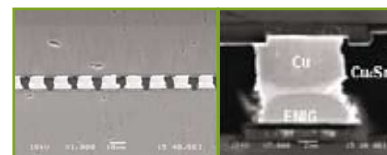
Cross-section of micro joints with CuSn solder micro bump joined to ENIG.
